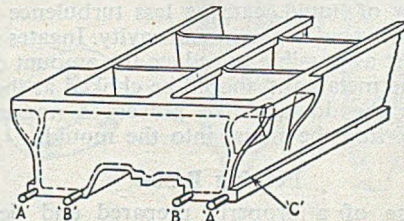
Sketch of a Horizontal Boring Machine Bed Casting.
